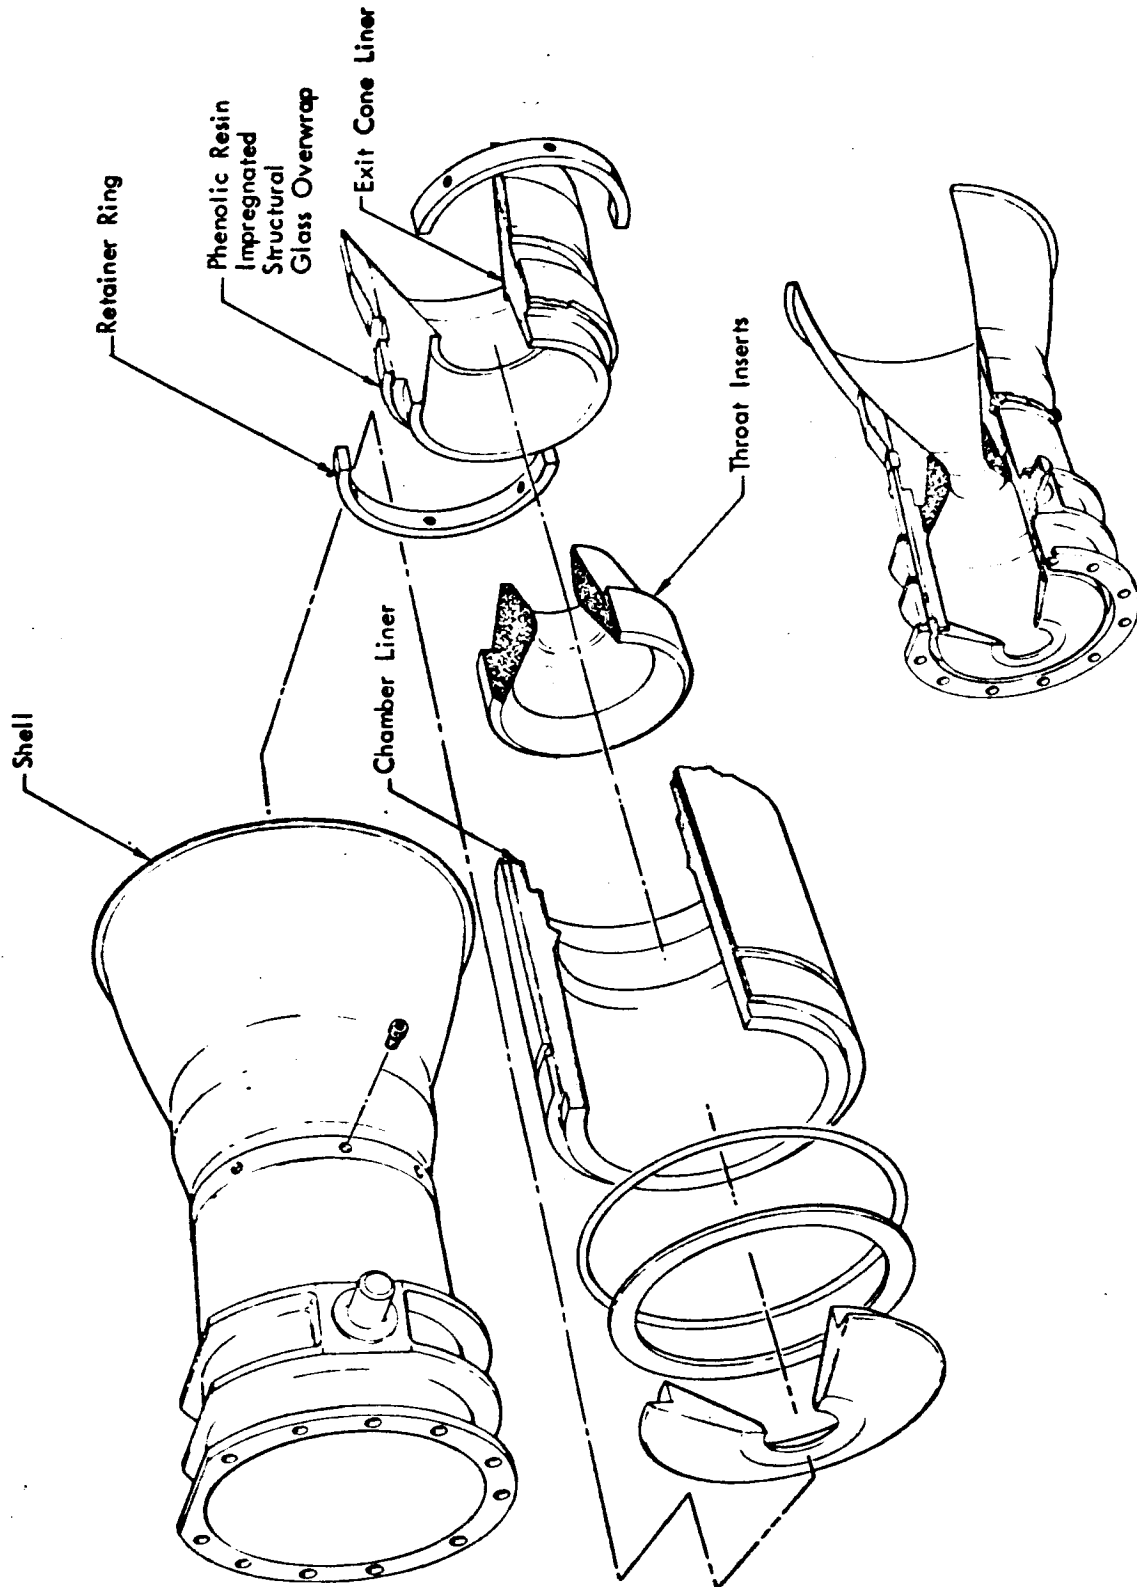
MIRA 150A Combustion Chamber and Nozzle Assembly (Exploded View)
